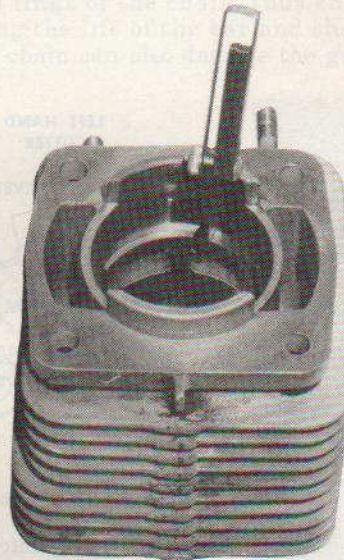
Clearance between ends of ring (ring end gap) should be measured with feeler gage as shown. Make sure ring is straight in cylinder.
